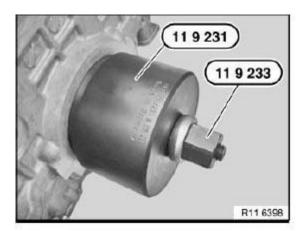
Identifying Crankshaft Seal With Special Tool Courtesy of BMW OF NORTH AMERICA, INC.
